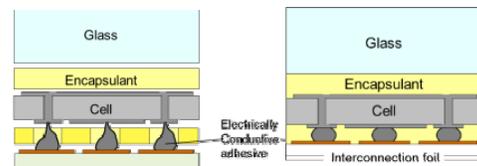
shows a schematic drawing of the lay-out of a foil-based module and cross section of such a module after lamination. Conductive adhesive paste is stencil printed on the conductive back-sheet. The rear-side encapsulant sheet is then punched and placed on the back sheet with the openings in the encapsulant corresponding to the position of the conductive adhesive. The
